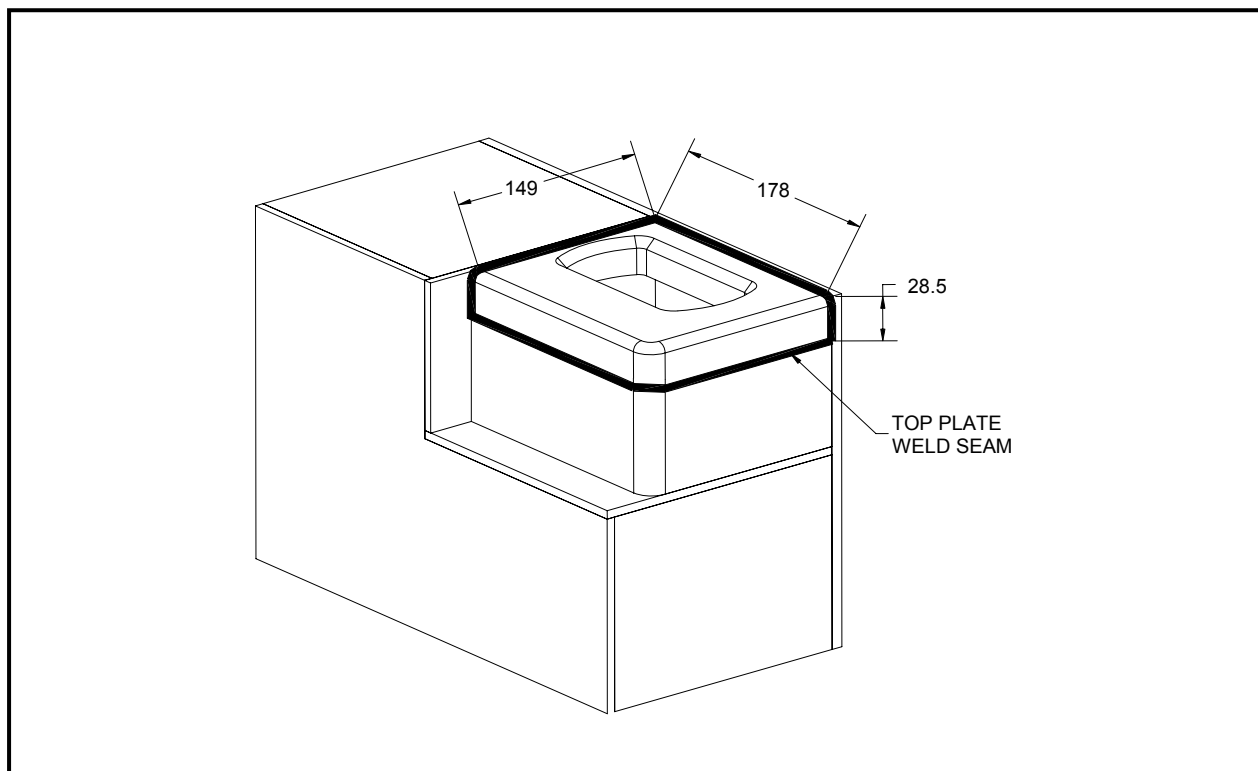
Shear Failure of Twistlock Top Plate Attachment Welds
